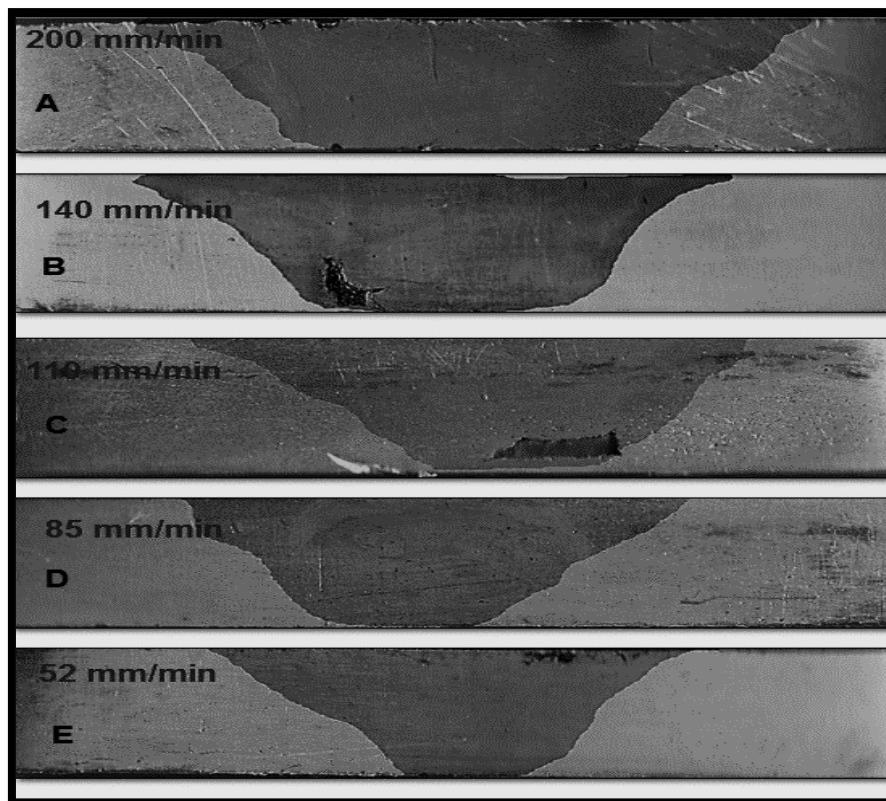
Optical macrographs showing the cross-sections of the workpieces processed at different welding speed and tool rotation speed. A- 2000 rpm, B- 1600 rpm, C- 1500 rpm, D- 1200 rpm and E- 800 rpm.
